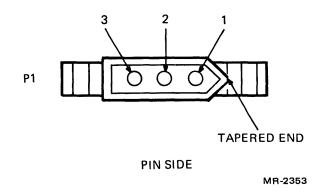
Disk Drive Assembly, ac Cable Connector Pin Locations
